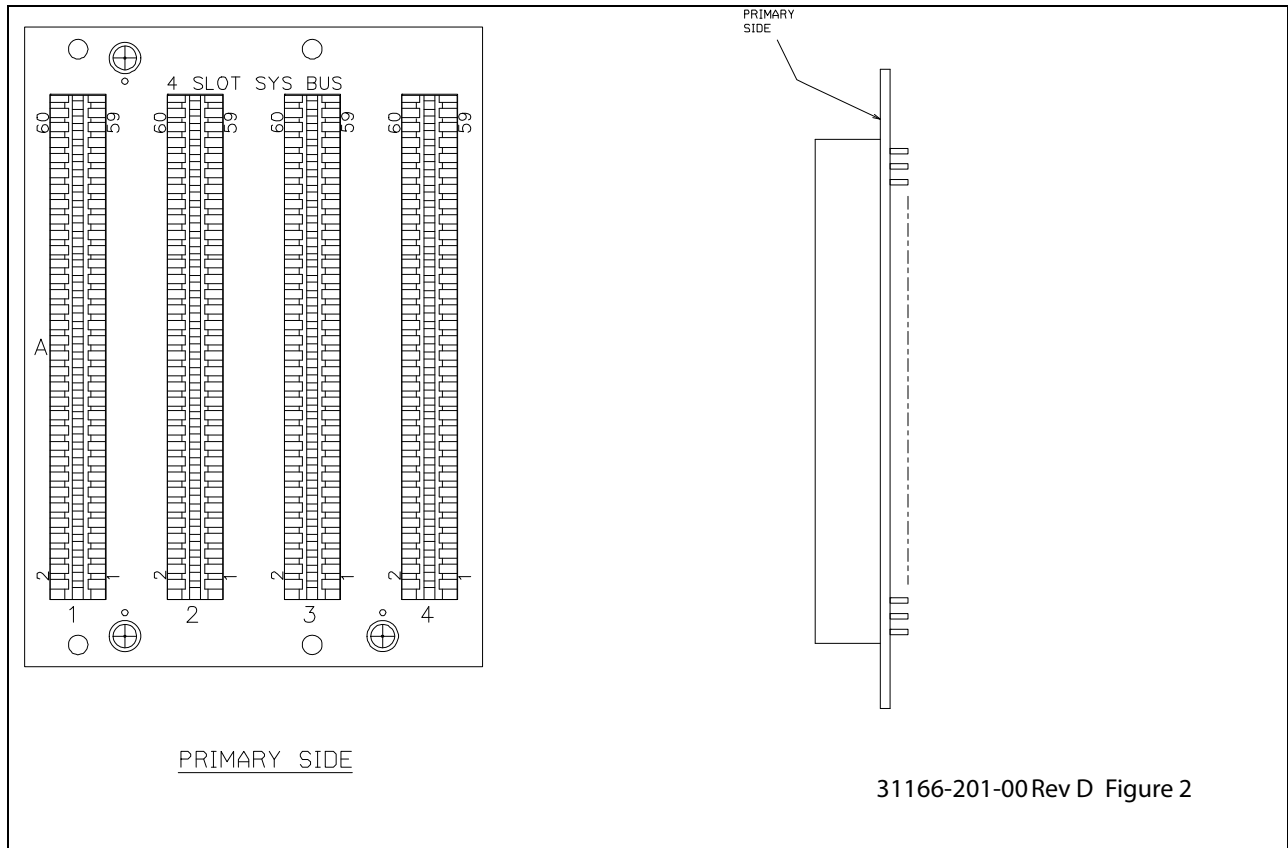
Main Bus Board Assembly, P/N 31166-201-04
